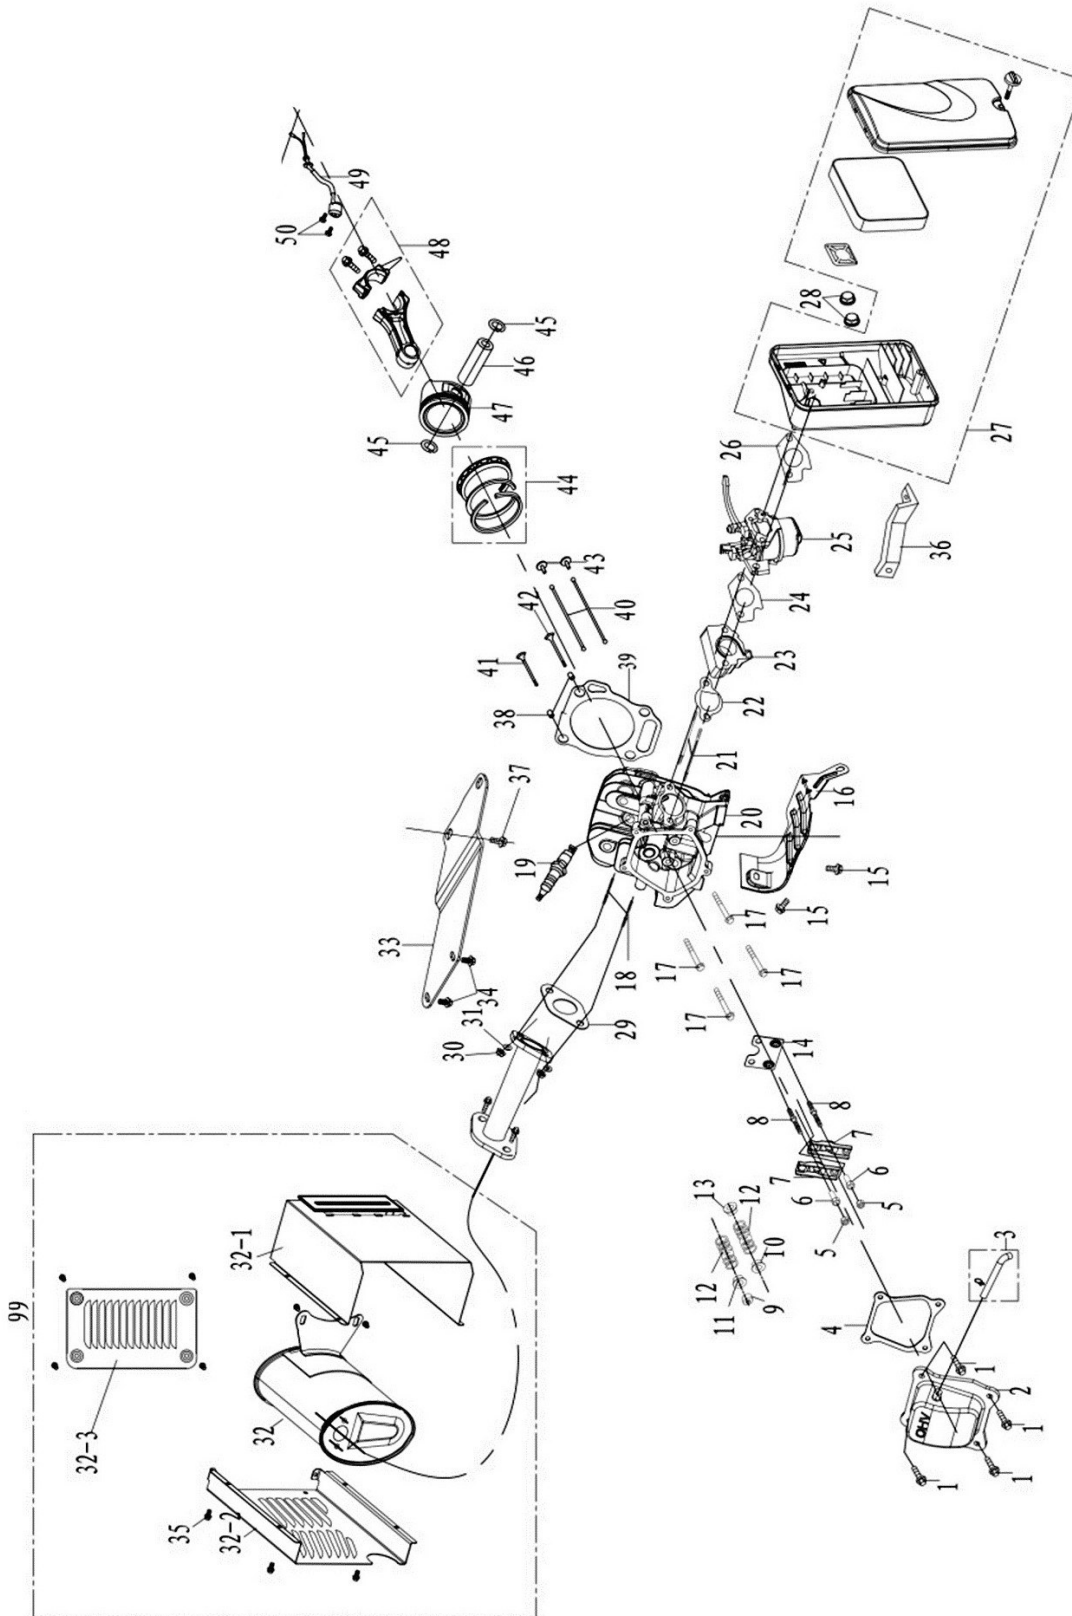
Spare parts drawing 5 PG-E 30 SRA
